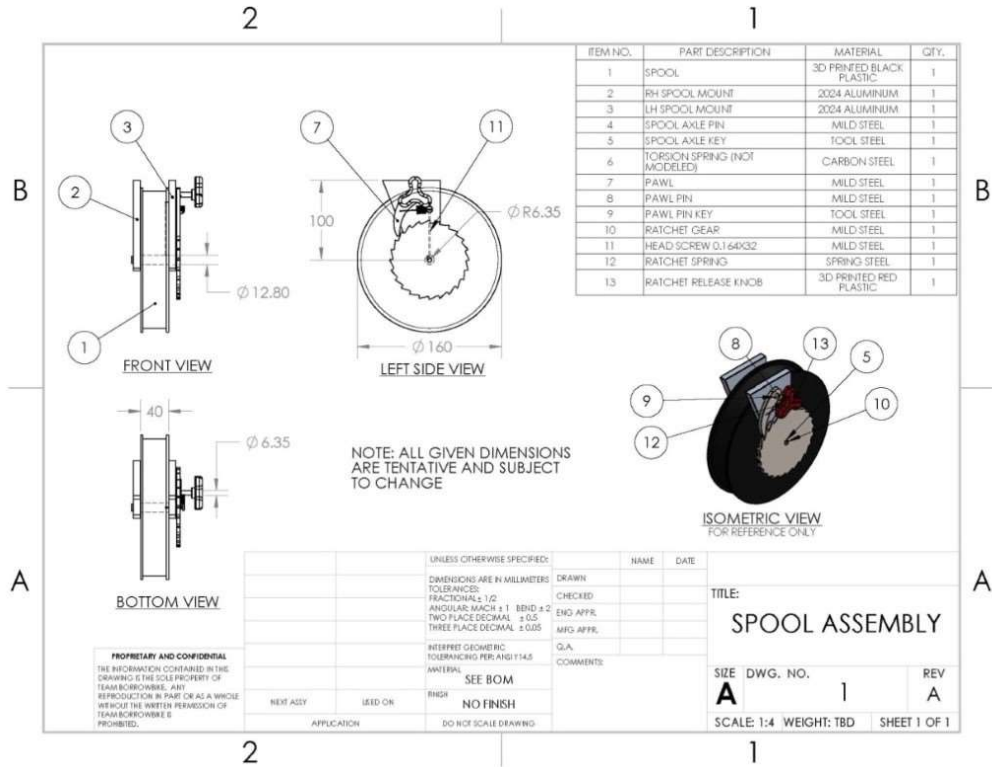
The retractable cable spool and ratchet assembly drawing, displaying the major components and critical dimensions.
